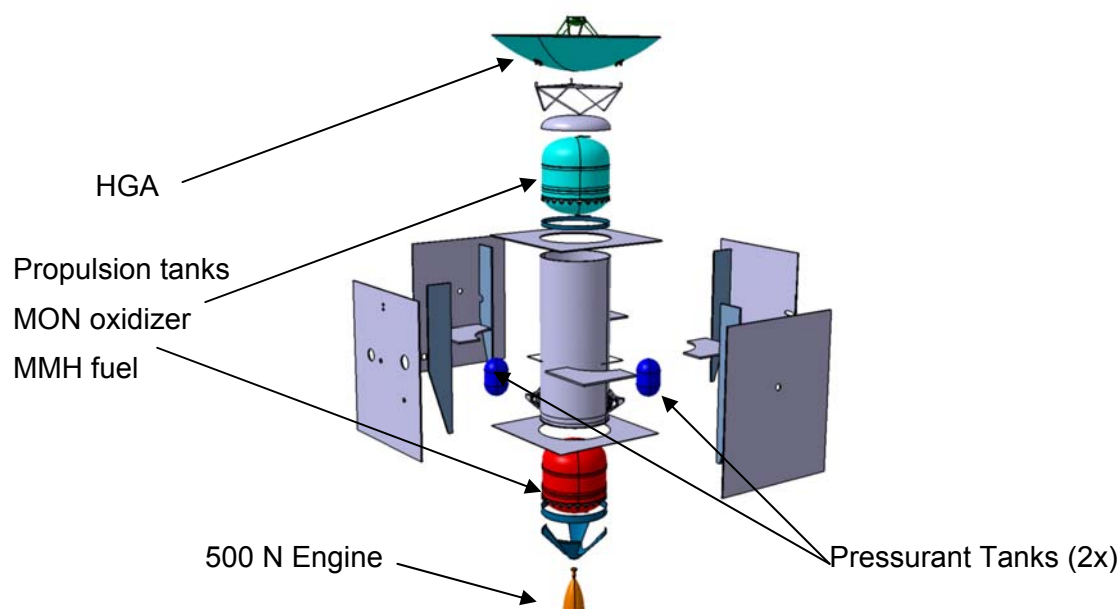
Main configuration driver, central cylinder for large propulsion tanks; exploded view.
